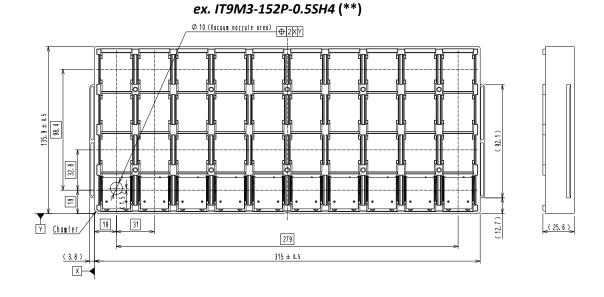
Hard Tray for IT9 Plug (dimensions in mm)
